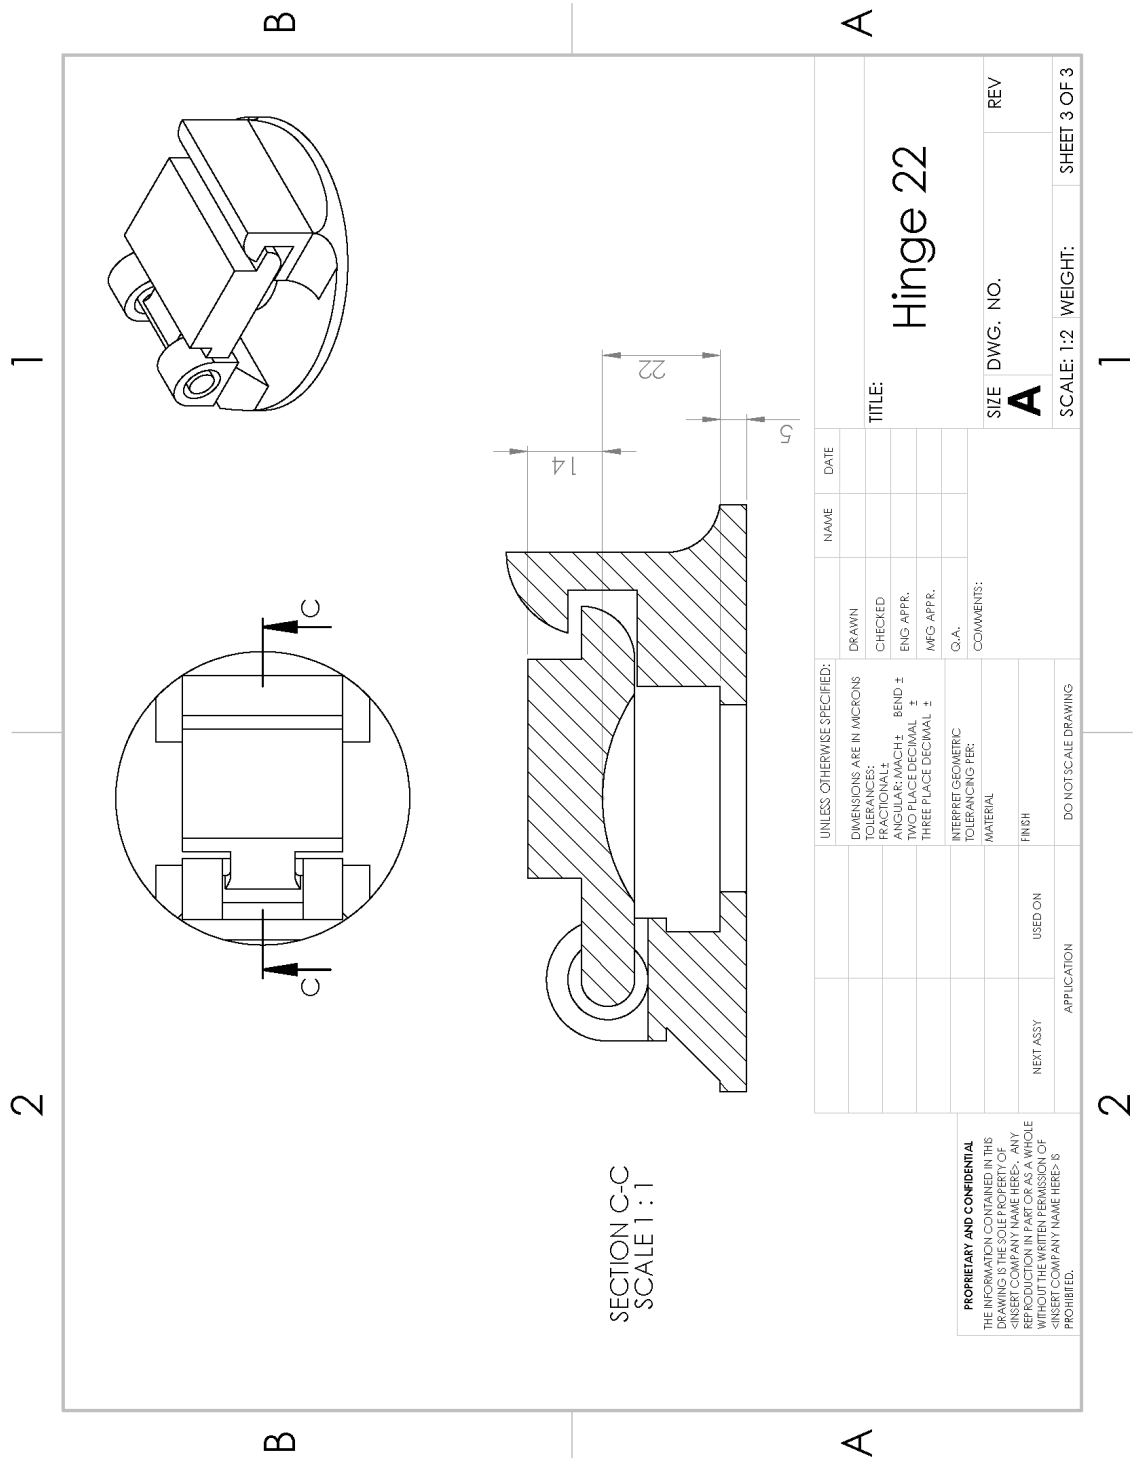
Technical drawing of the hinged FP cavity RI sensor, page 3.
